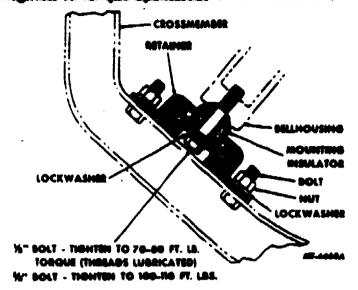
Engine Rear Mounting With One-Piece Insulator.
